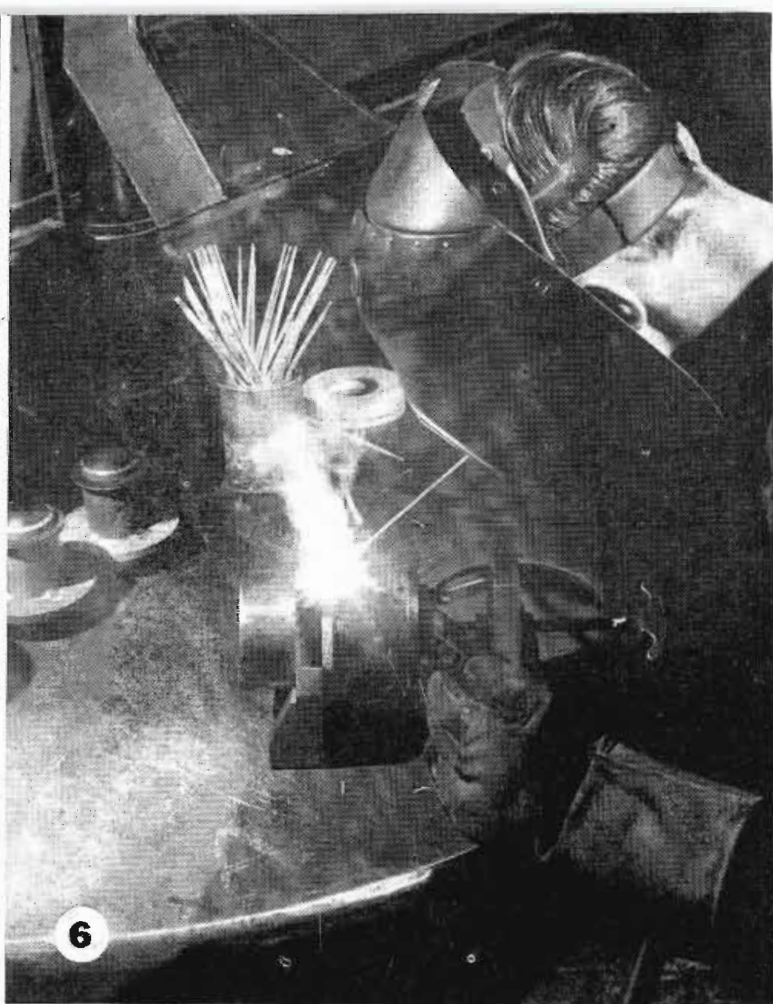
Welding of the magnet assembly is one operation in the assembly of the 713C unit, a specially designed loudspeaker receiver. When coupled with Western Electric's 757A, its frequency range is 800 cycles to 15 kc
